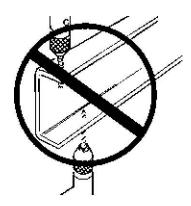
Frame Rail Flange Drilling Prohibited
